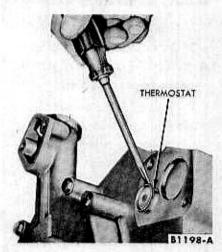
Cylinder Block Thermostat Removal—430 Engine
